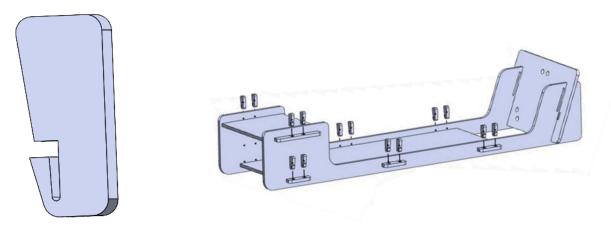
New design of the locks and how they fit into the gaps during assembly.
